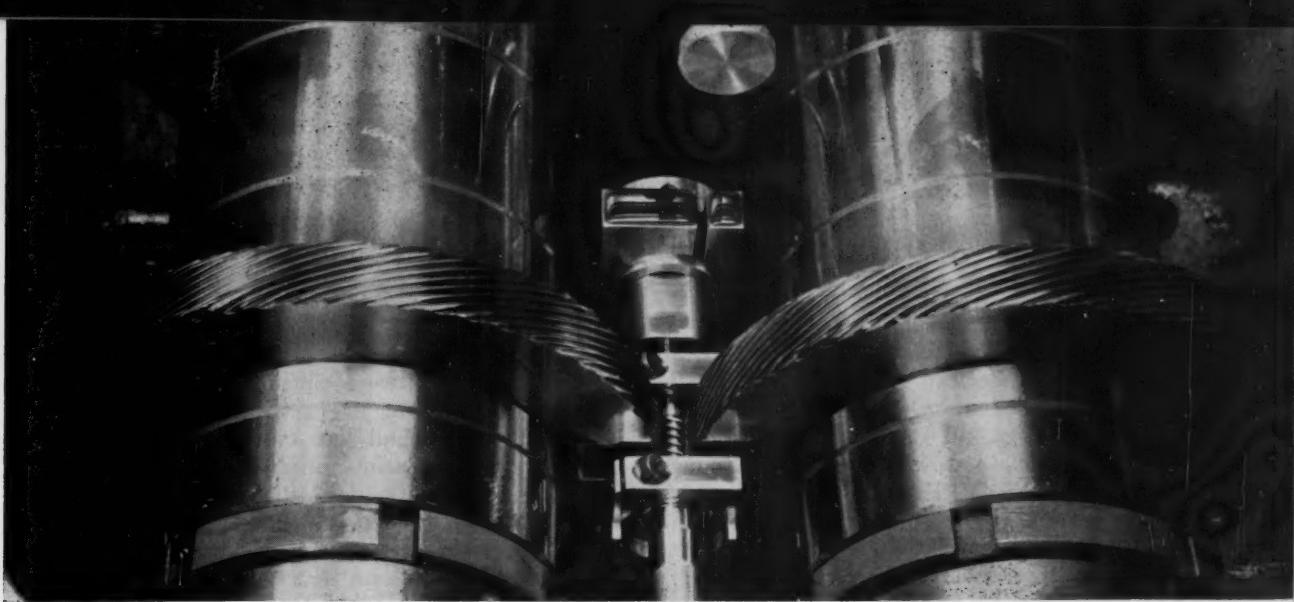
Close-up of rolls used on machine shown in Fig. 1 for rolling worm thread
